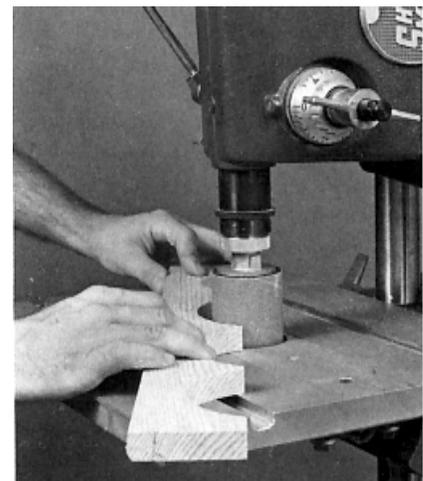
Work this way when sanding edges. The setup assures that sanded edges will be square to adjacent surfaces.
